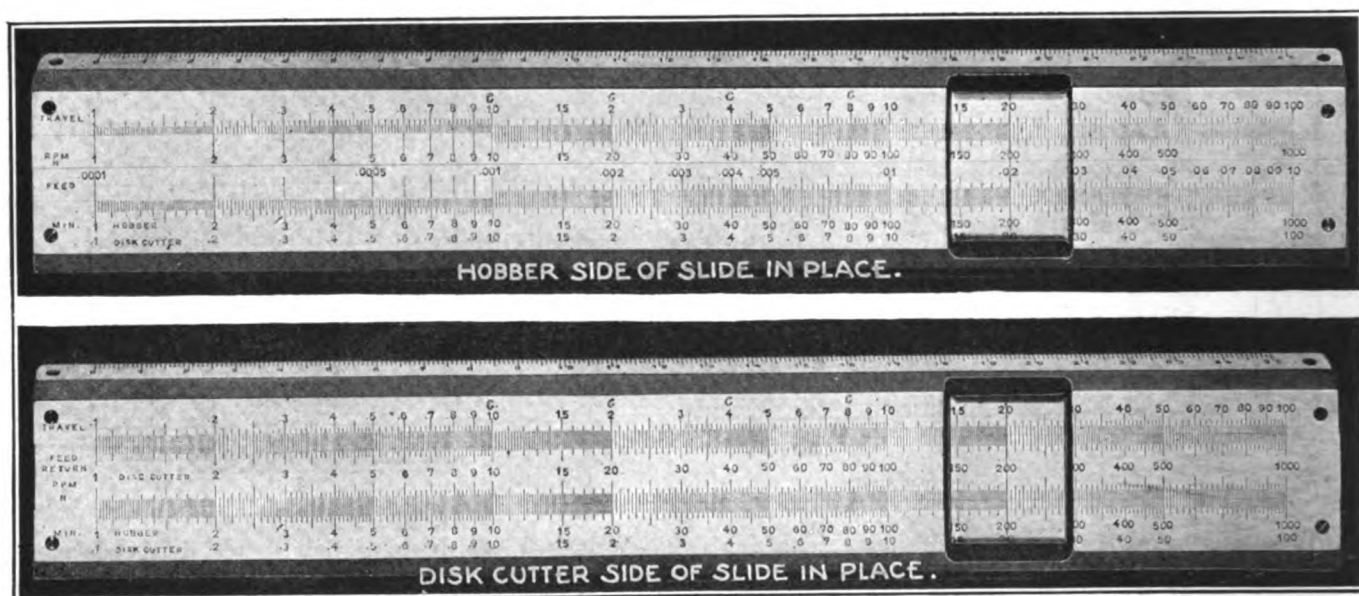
SLIDE RULE FOR HOBBING AND DISK-CUTTER TYPE MACHINES
